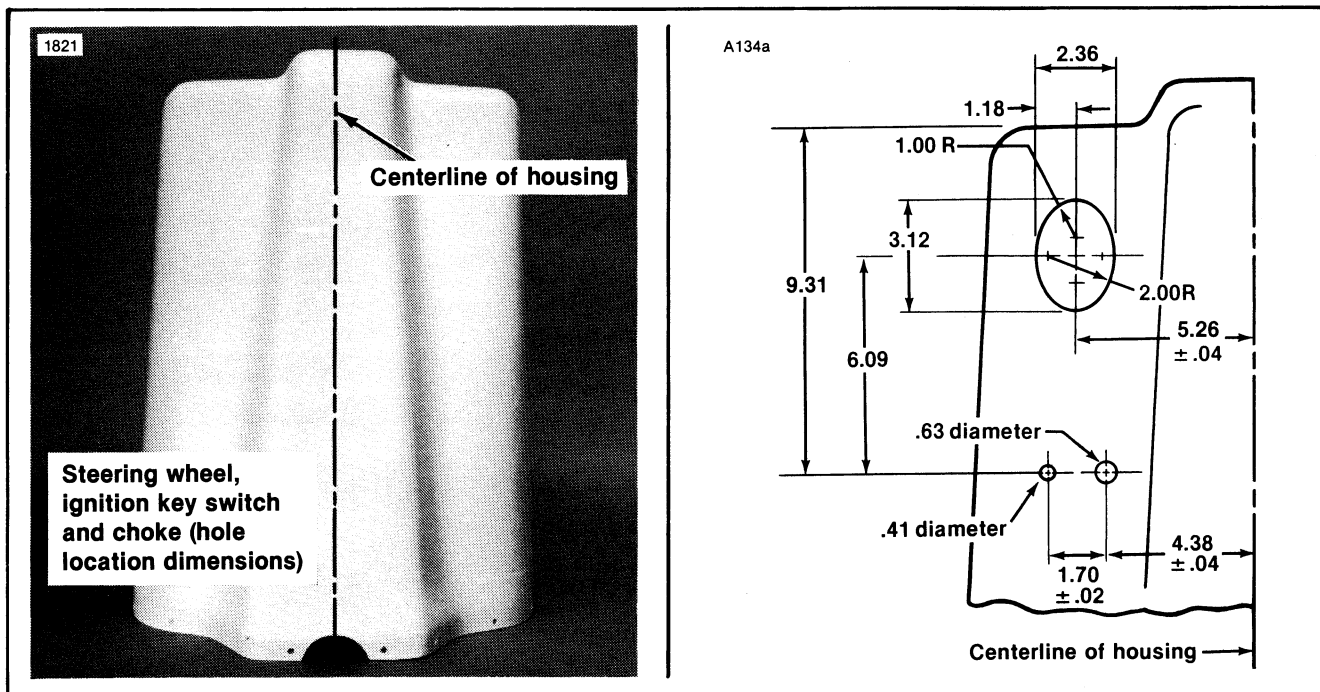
Location of Holes for Front Housing — 3 Wheel
